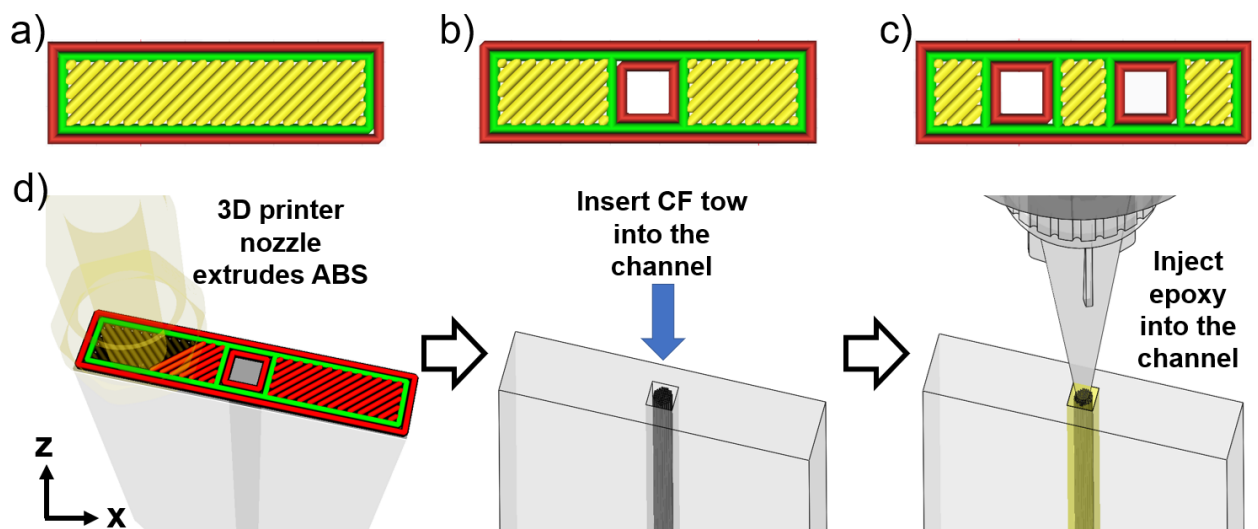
Printed layer configuration of a) standard sample, b) L-shape channel sample, and c) U-shape channel sample. d) Schematic diagram showing Z-pin insertion process.
